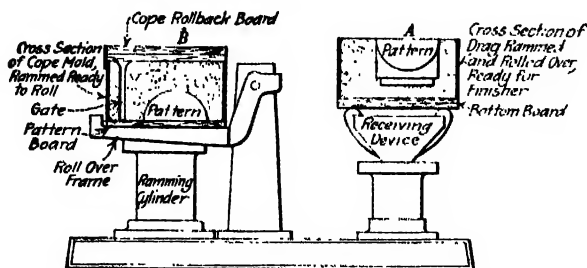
Jolt Roll-Over Molding Machine Producing Work from Loose Patterns
